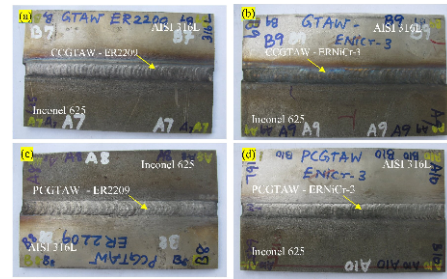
Photographs of the dissimilar weldments of Inconel 625 and AISI 316L employing CCGTA welding using: (a) ER2209 filler; (b) ERNiCr-3 filler and PCGTA welding employing: (c) ER2209 filler; (d) ERNiCr-3 filler, respectively.
